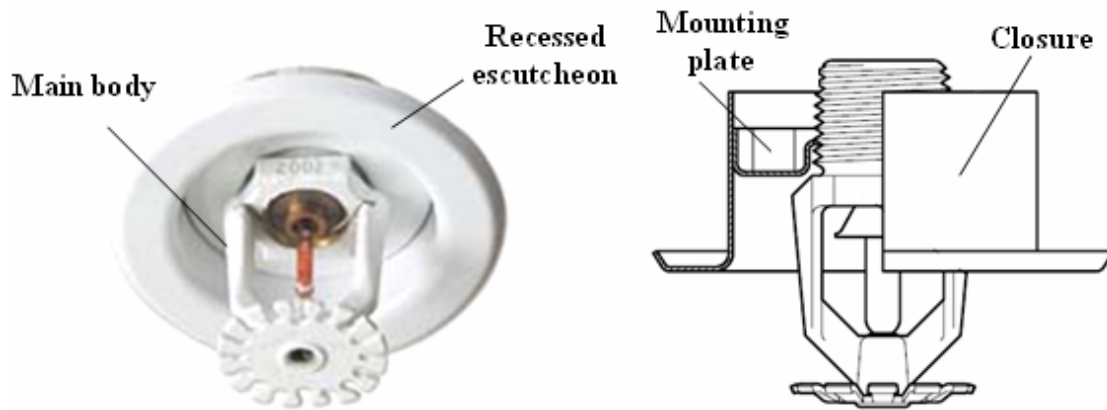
Typical recessed pendent sprinkler (Tyco Fire & Building Products 2006)
